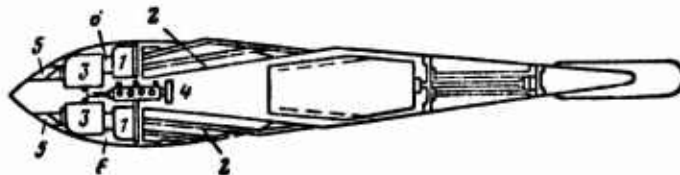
Piston-driven compressor VRD of A. Gorokhov (1911): 1 - combustion chamber; 2 - nozzles; 3 - compressors; 4 - engine for driving of compressor; 5 - inlet channels; 6 - valves for air inlet into combustion chambers.
